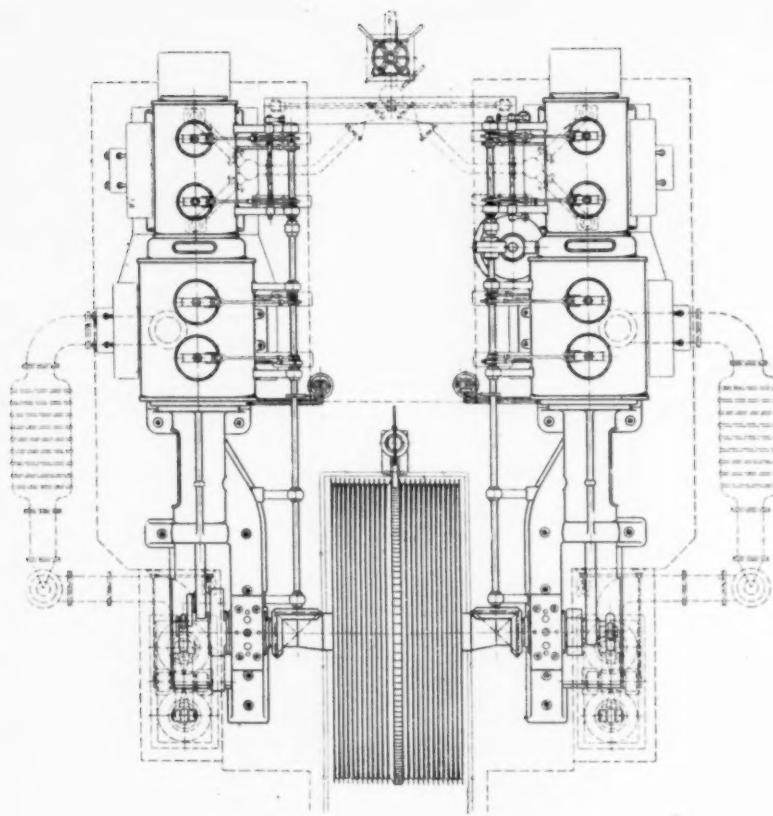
TWIN-TANDEM ENGINE, PLAN
